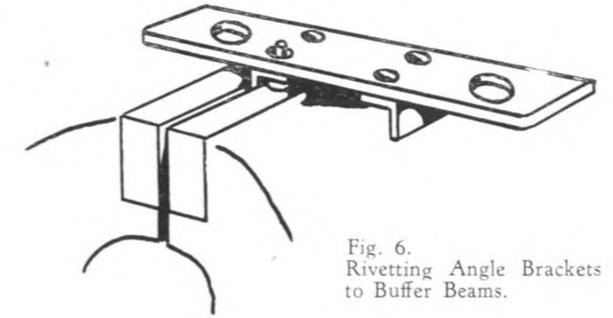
Rivetting Angle Brackets to Buffer Beams.
